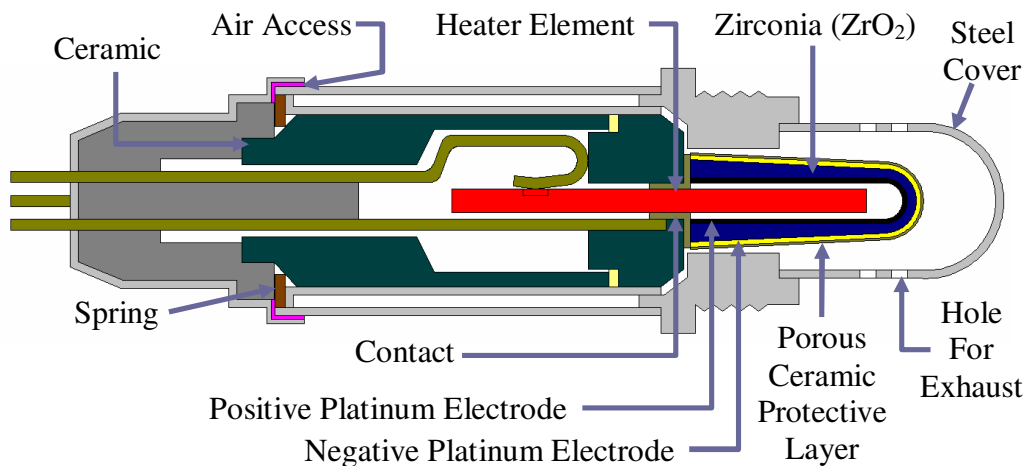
HEGO Sensor BOSCH LSH25, adapted from [3]
